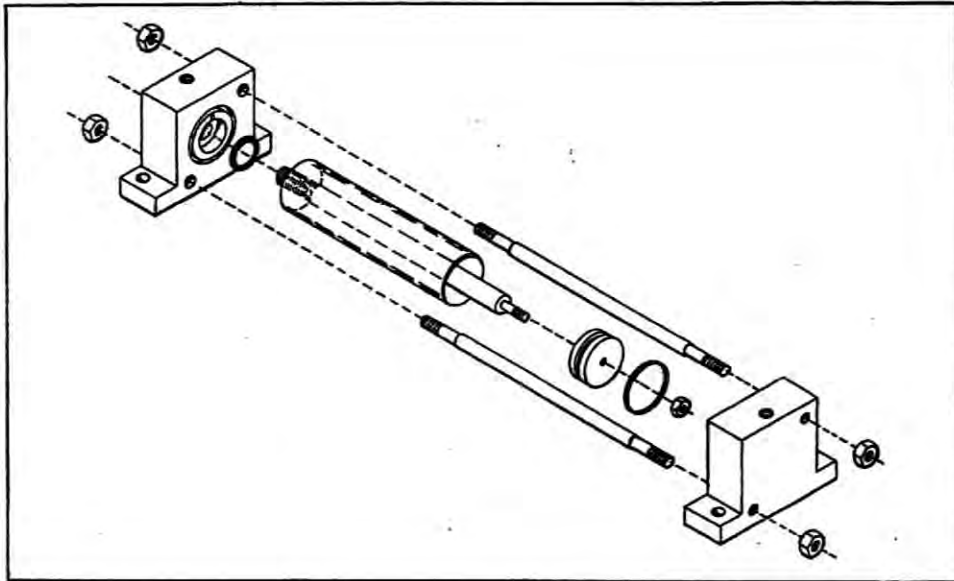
Pneumatic Cylinder Being Manufacture in CIM System (Donald P. Williams)
